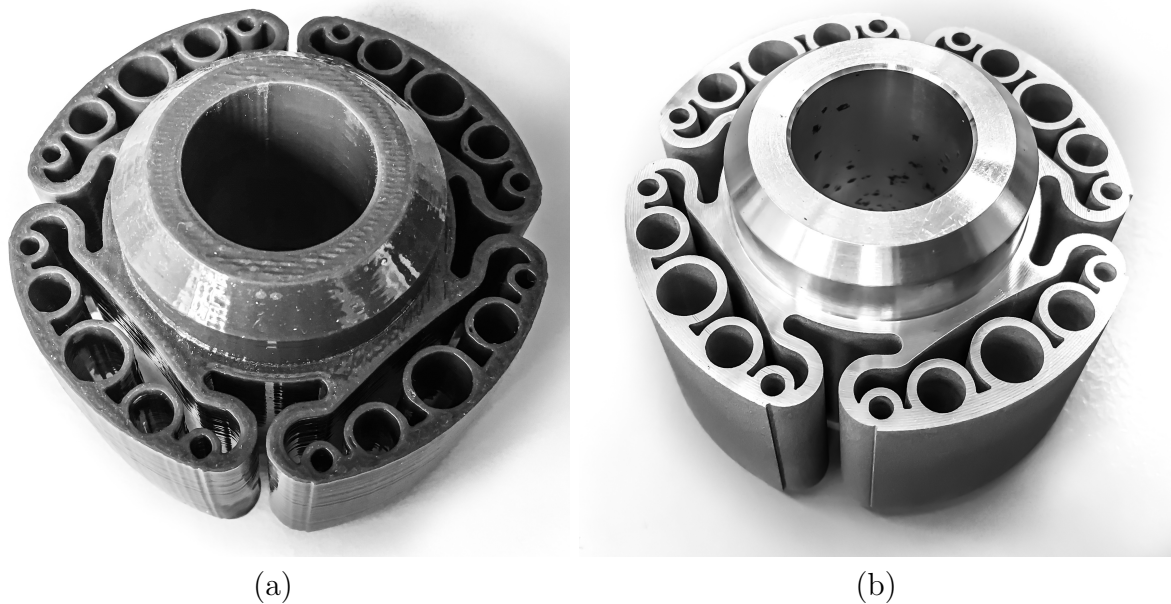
New design of a hub for high rotational speeds, (a) Prototype made with additive manufacturing, (b) manufactured of aluminum with wire cutting.
